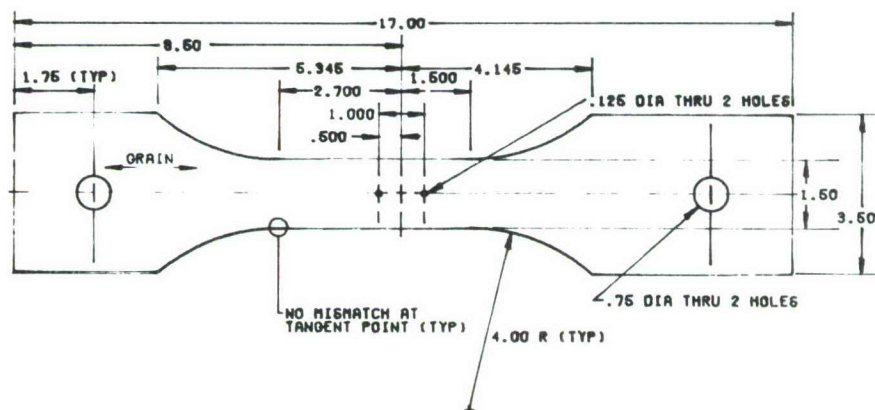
Dimensioned Sketch of Test Specimen Blank Configuration
